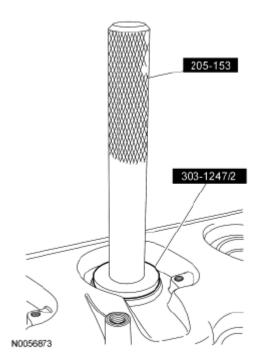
Identifying VCT Spark Plug Tube Seal Installer And Handle Courtesy of FORD MOTOR CO.
